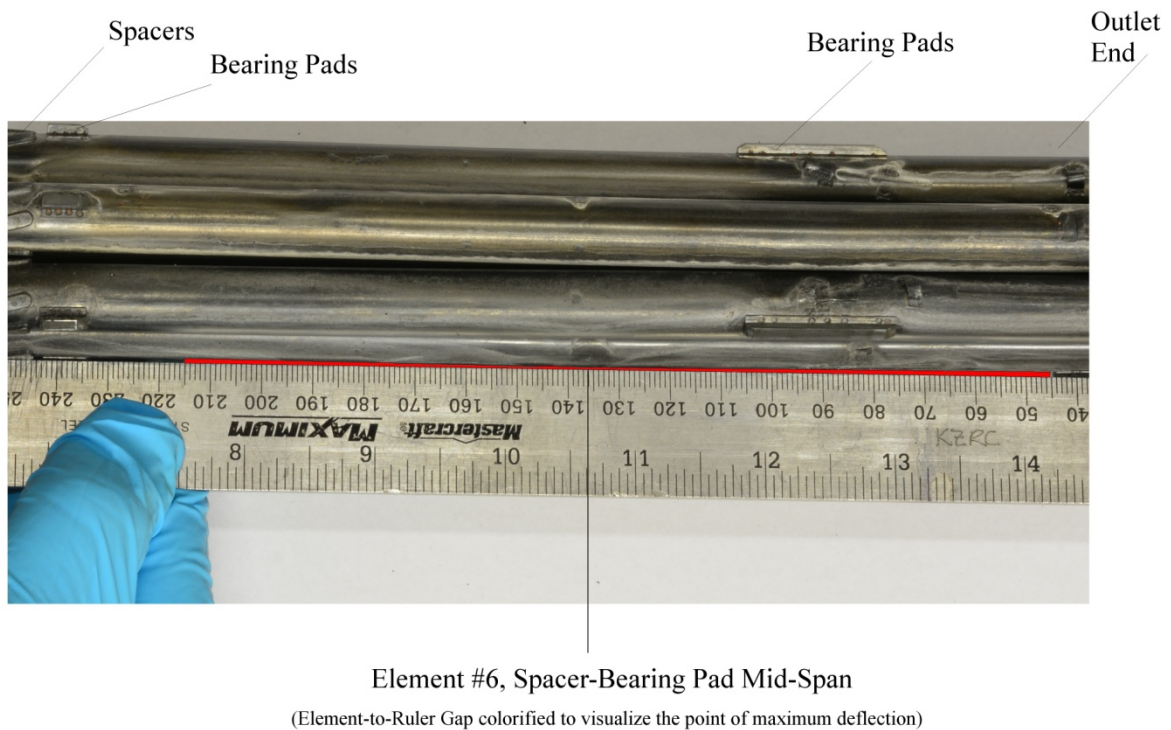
Bundle Side View; Maximum Deflection at the Point of Measurement (Mid-Span between the Bearing Pad and Spacer Planes)
